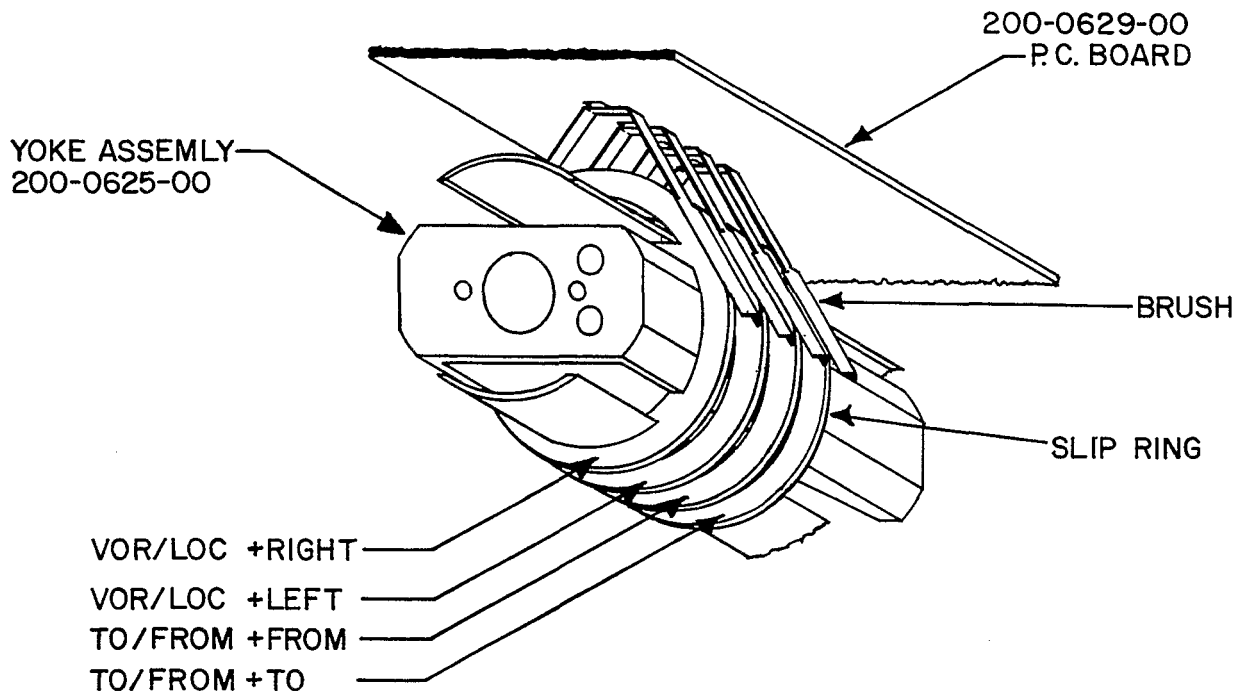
CENTER YOKE WITH NAV AND TO-FROM BRUSH ASSEMBLY
